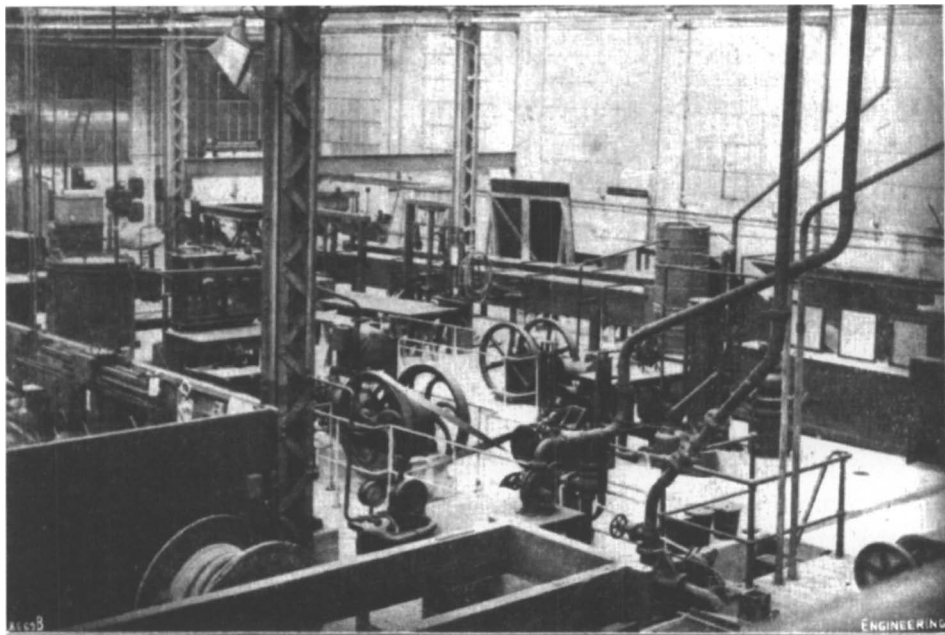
View of Bessemer Laboratory (*Engineering*, 1951).
